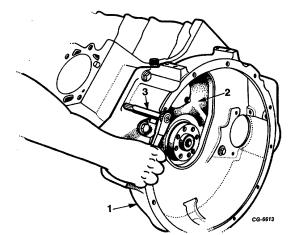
Reaming Flywheel Housing-to-Crankcase Roll Pin Holes
